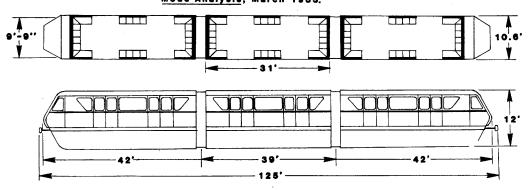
WED Type III Straddle Monorail Showing Typical Plan and Profile
